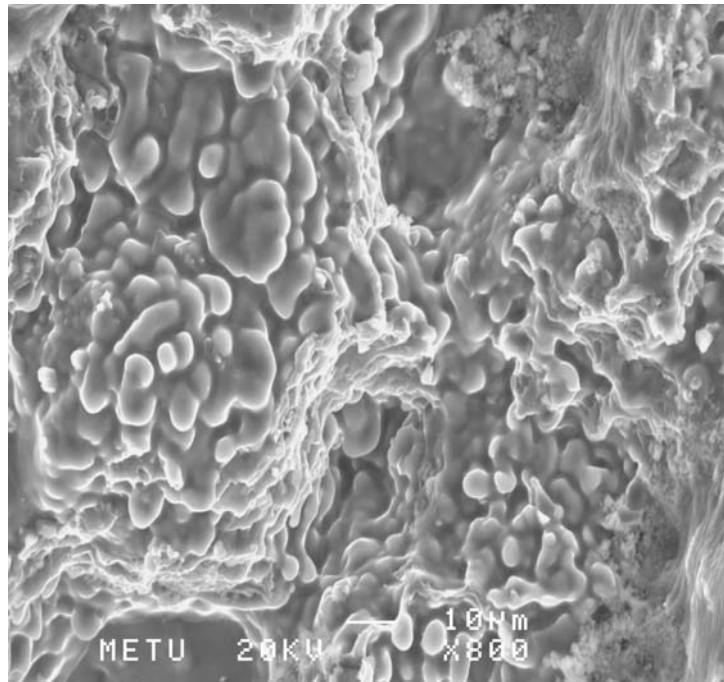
Fractography of a solidification crack located at the weld metal of 7039-5356 aluminum alloy.
